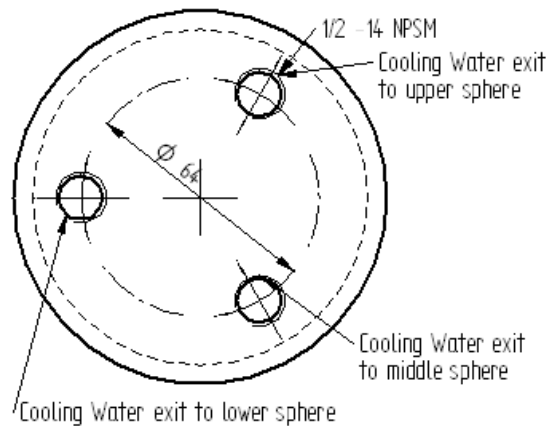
Technical Drawing of the Cooling Water Distributer Apparatus, Bottom View.
